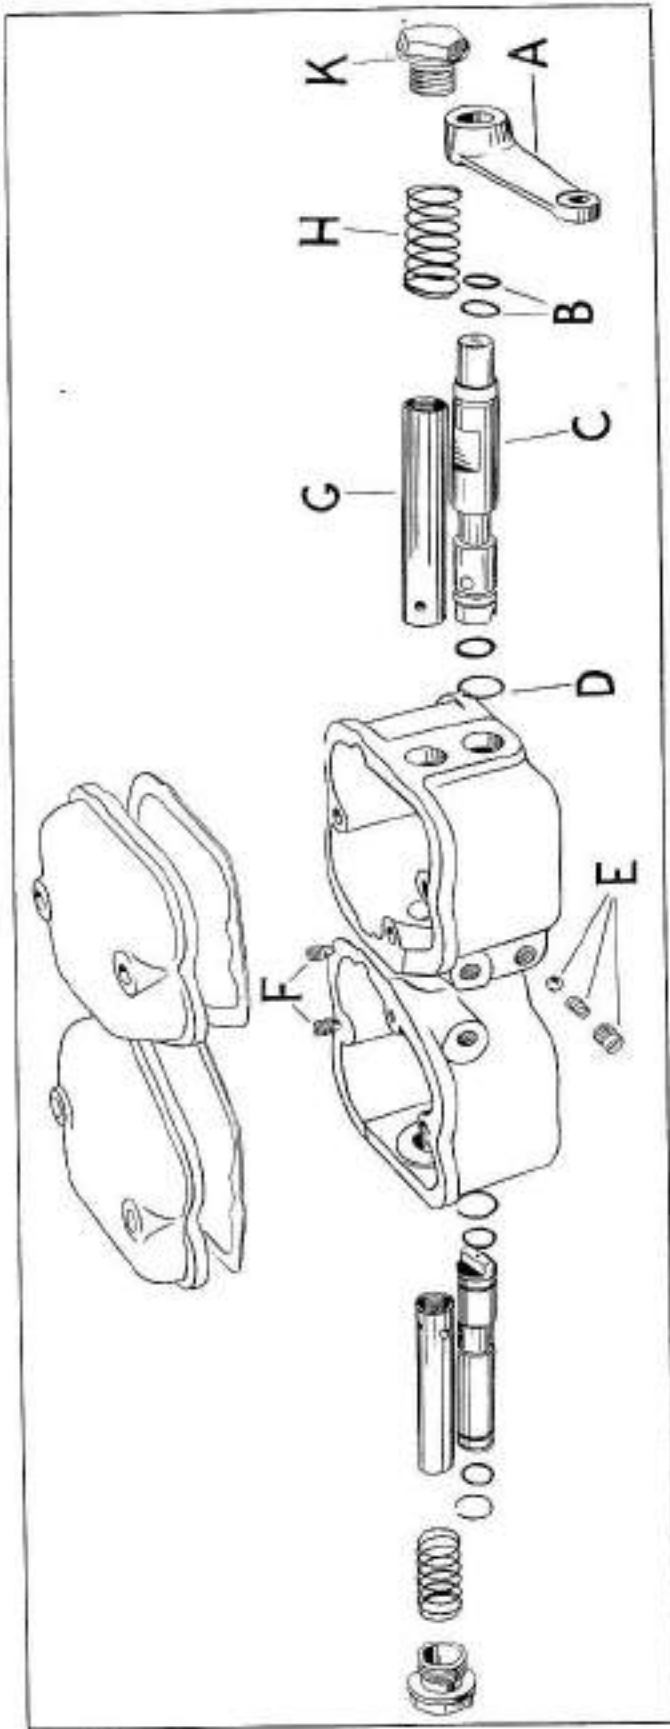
EXPLODED VIEW OF ROCKER BOXES
